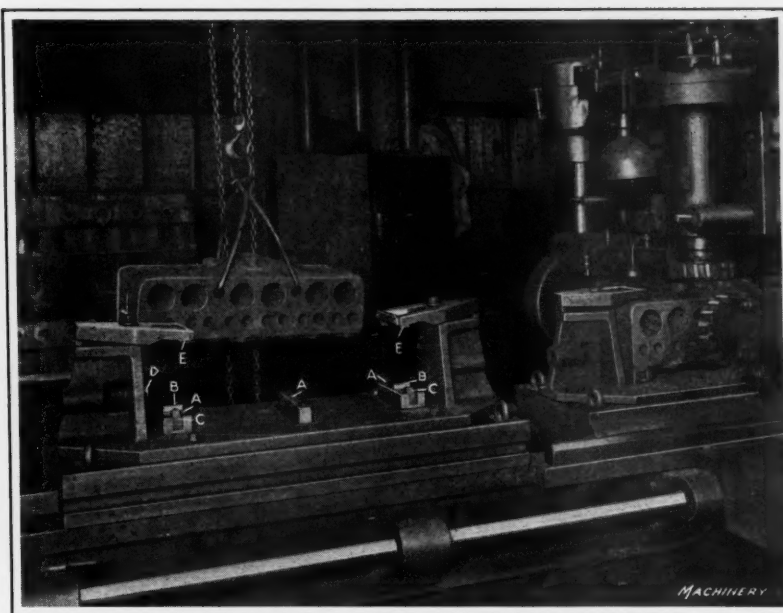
Work-holding Fixture and Method of setting up Work for Second Operation on Hudson Cylinder Blocks
